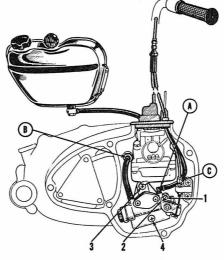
Drawing of "SUPERLUBE" oil injection. Refer to text for adjusting.
